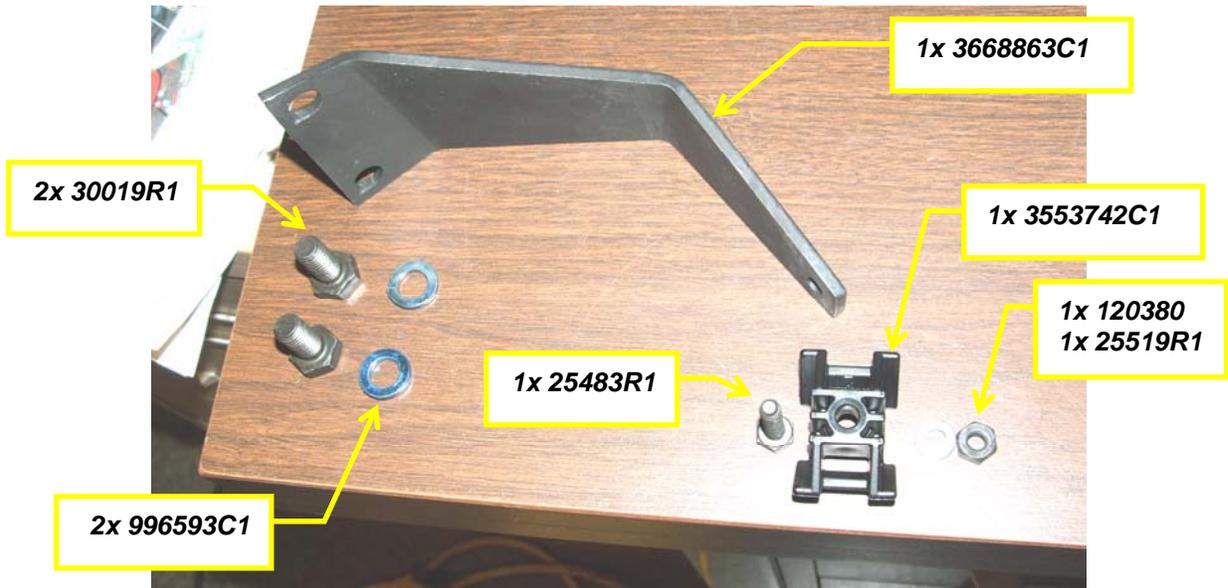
Forward Engine Block Mounting Bracket Parts.
